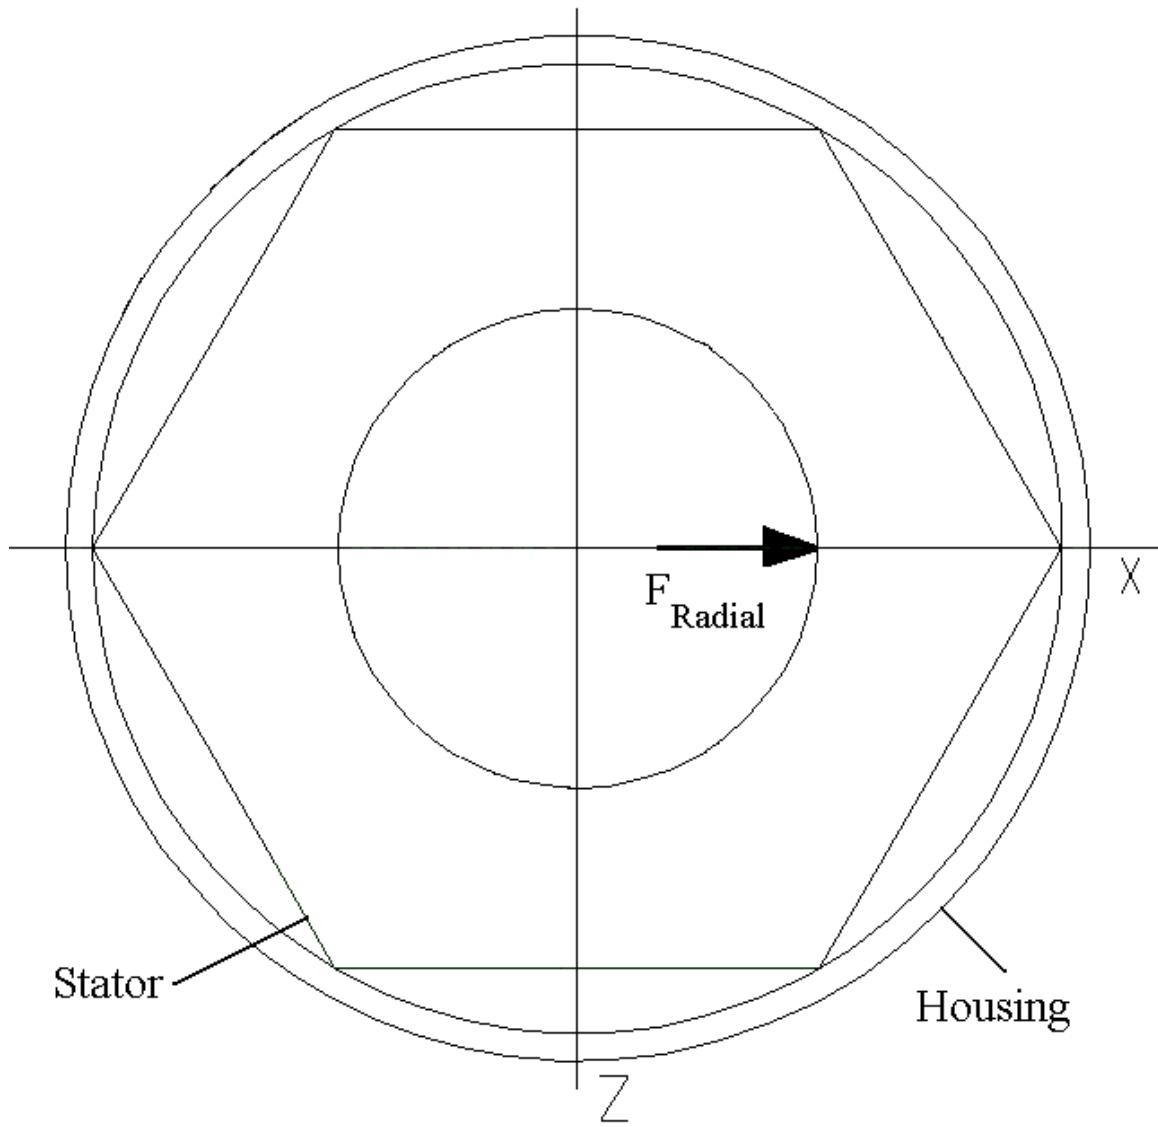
Cross-sectional view of the partial housing/stator assembly with the applied force
